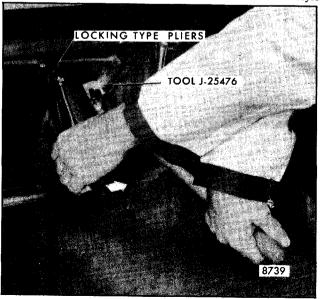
Torque Rod Tool Removal - Cadillac K Style
